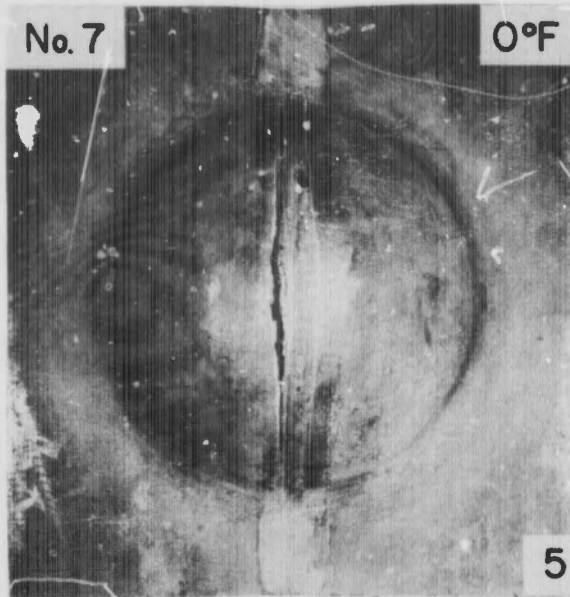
Explosion bulge test fracture characteristics of low welding energy input inert-gas-shielded metal-arc weldments. (Code Z, HY-80 heat No. 20120-12.)
